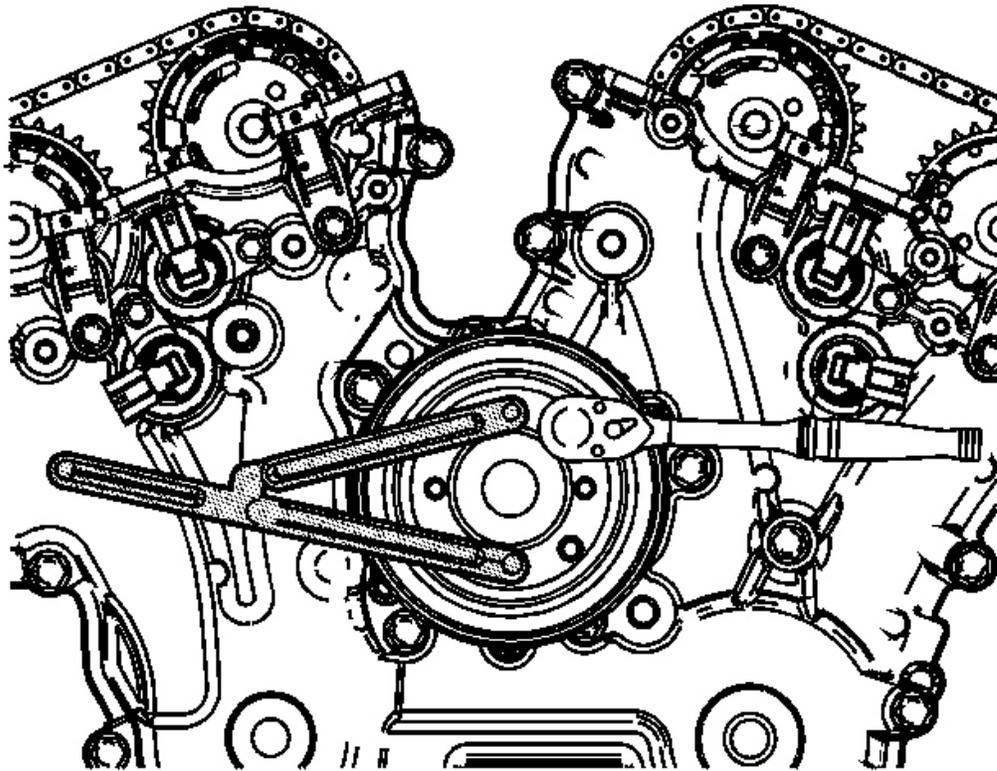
View Of EN 46104 Installed On Water Pump Pulley
